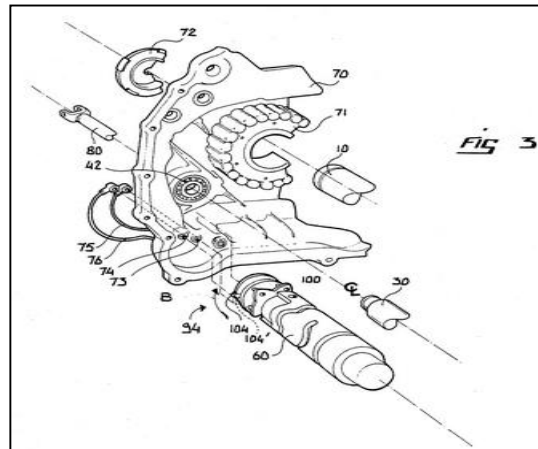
Rear engine casing showing the contact assembly, movement to signal reverse gear and back-up warning systems. [4]
